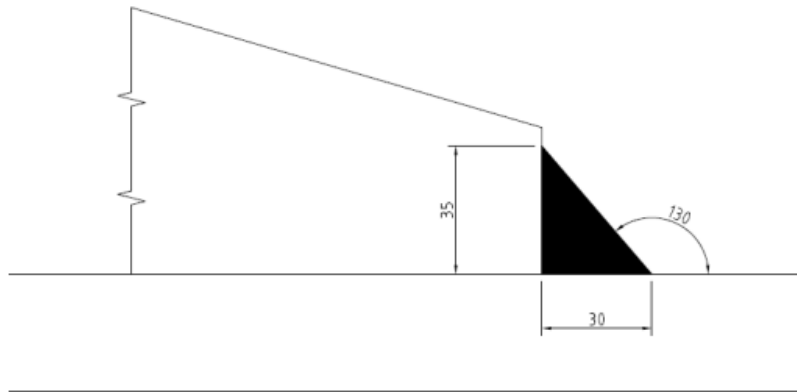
Weld geometry for a 50 mm thick plate provided by Aker Solutions
